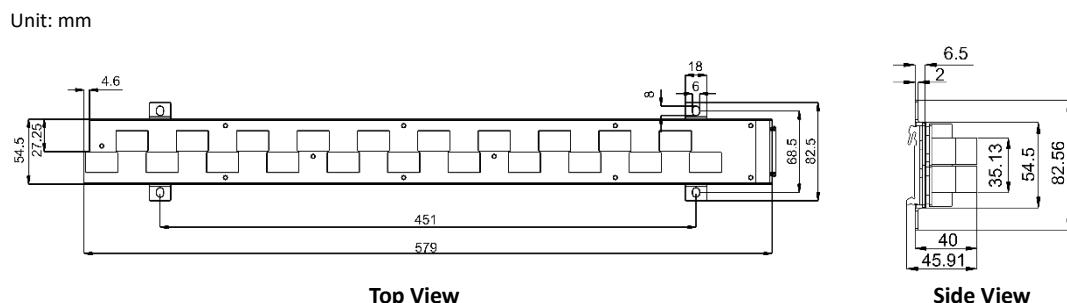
Dimensions of the 21-CT Strip with 1" Spacing
